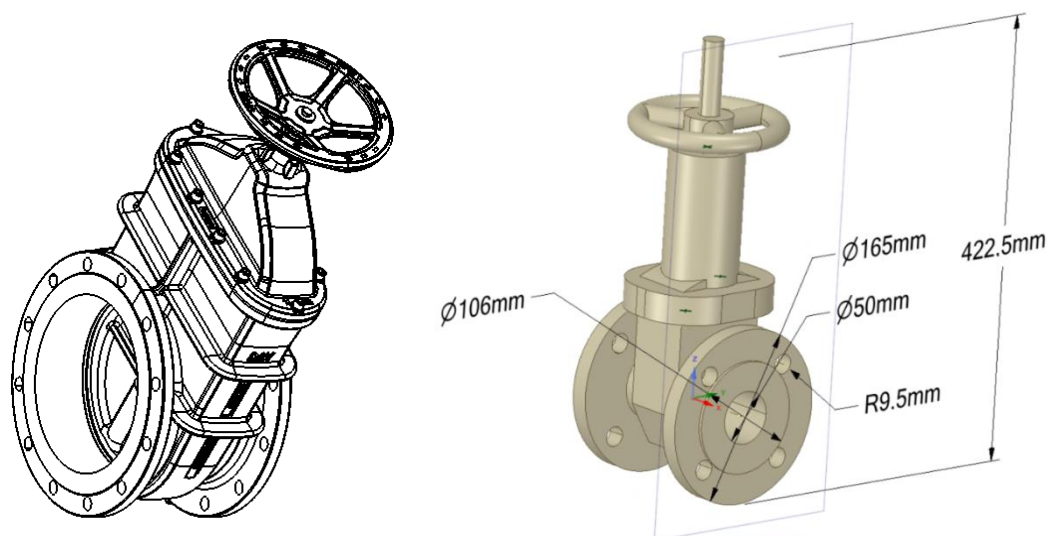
The slide valve IKO-Plus – DN50 – PN-R14. On the right, a drawing of the slide valve in ANSYS-SpaceClaim (VAG s.r.o., 2025).
